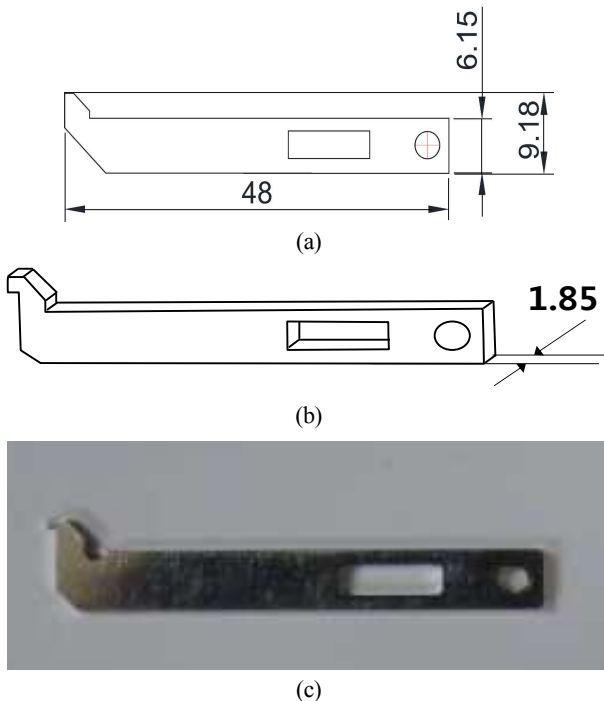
Dimensions and appearance of manufactured probe pin: (a) The plane of probe pin, (b) A three-dimensional drawing of the probe pin, (c) Manufactured probe pin
